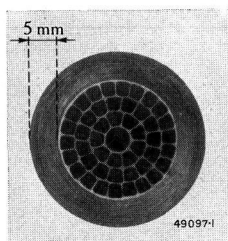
Section of a stator-winding bar for a 22,000-V generator.
